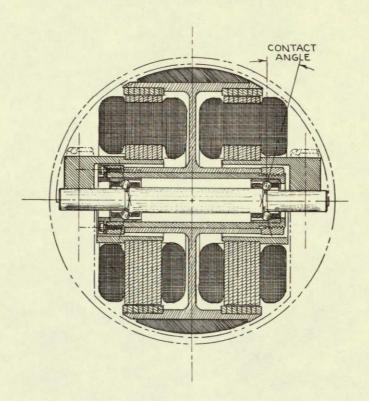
DF PRELOAD – INTEGRAL SHAFT
